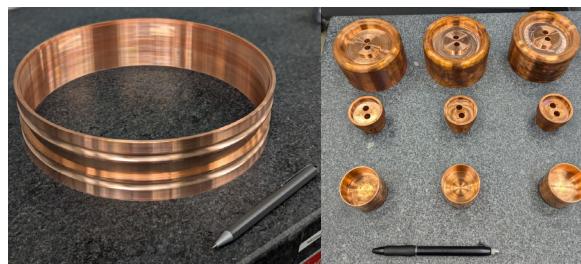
(Left) Outer conductor sleeve. (Right) Inner conductor sleeve and air side choke components.
